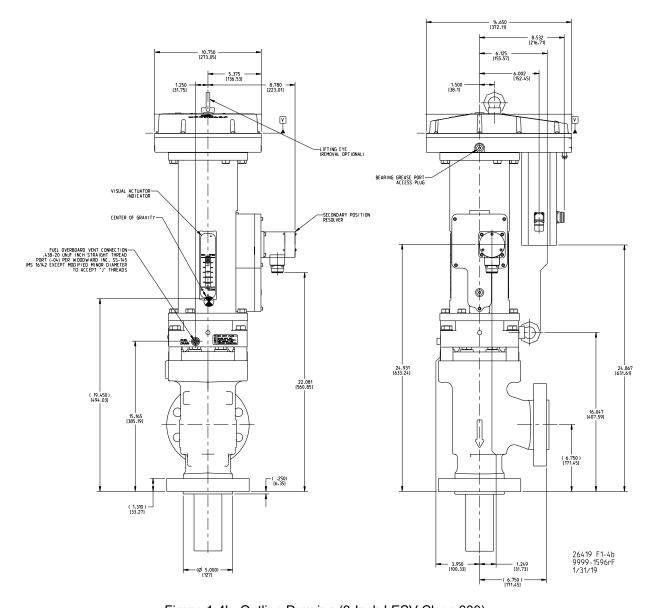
Outline Drawing (3-Inch LESV Class 600)
